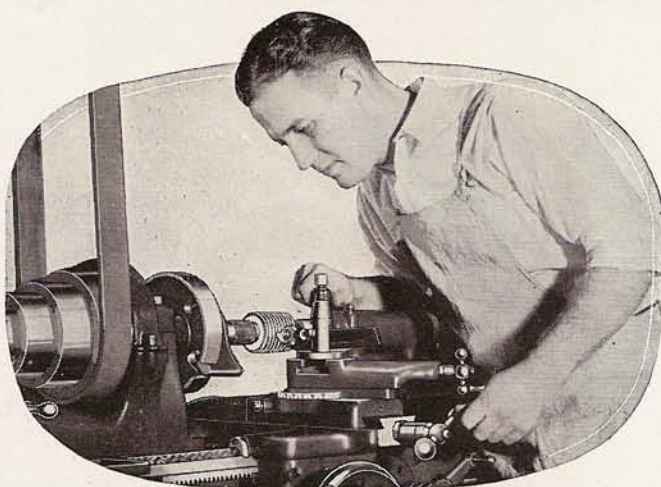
Cutting a Precision Screw Thread in a 16-inch Lathe.
